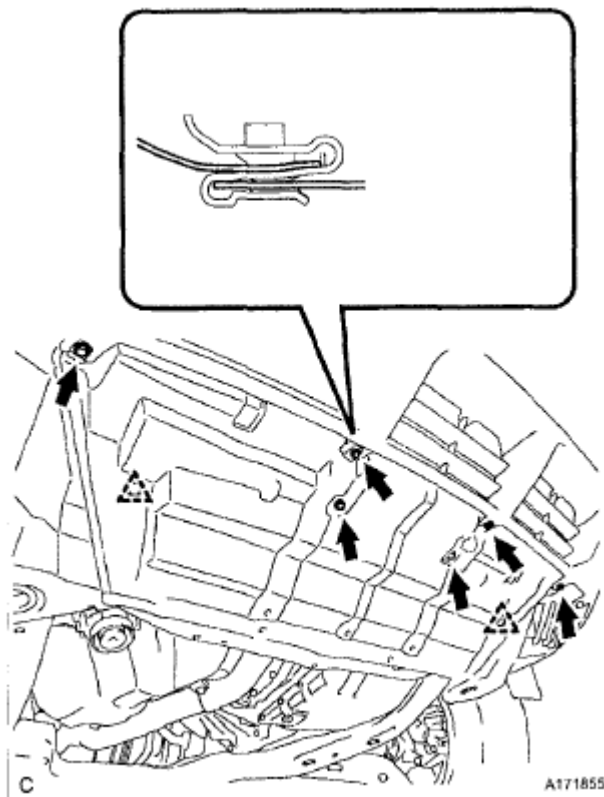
Locating No. 1 Engine Under Cover, Bolt And Clips
